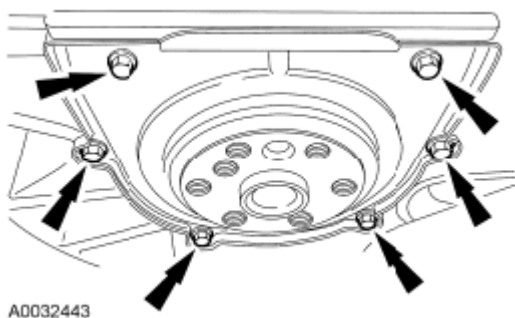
Locating Bolts & Rear Crankshaft Seal
